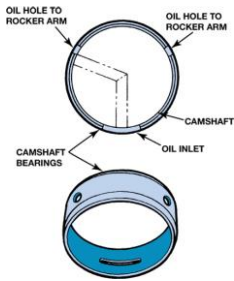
Cam-in-block engines support the camshaft with sleeve-type bearings.
